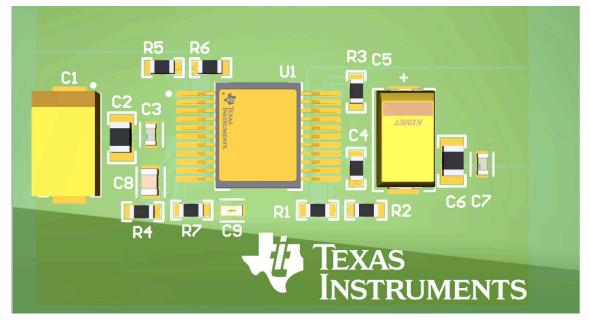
Printed Circuit Board Layout Example: 3D View
